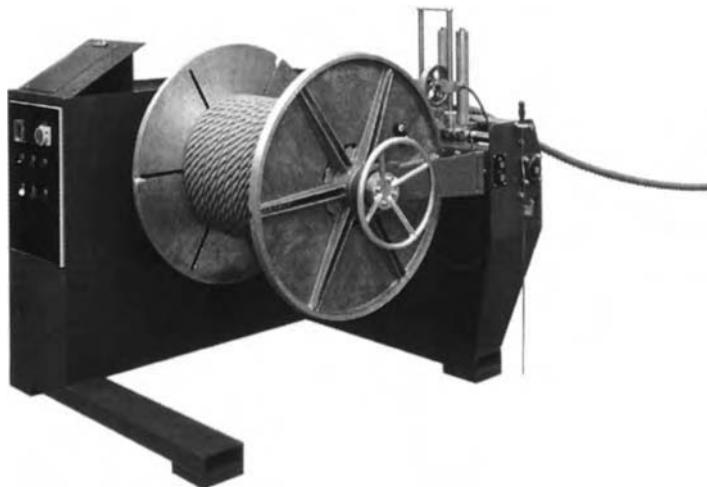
Coiler. Reproduced by courtesy of Roblon.
